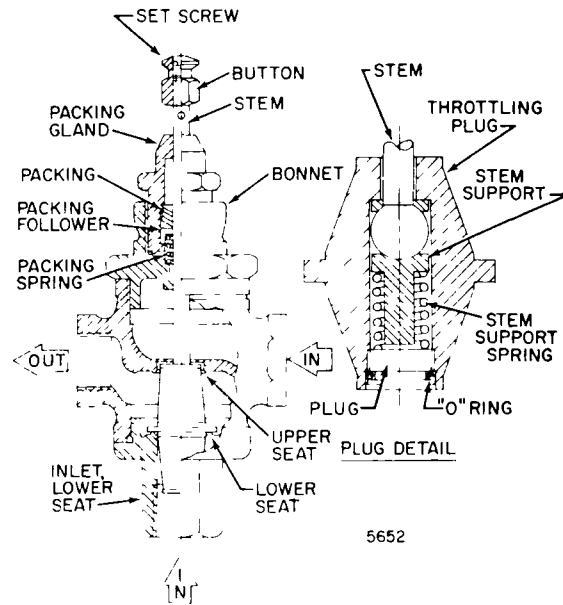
Cutaway of Typical V5013 Screwed Type Body
